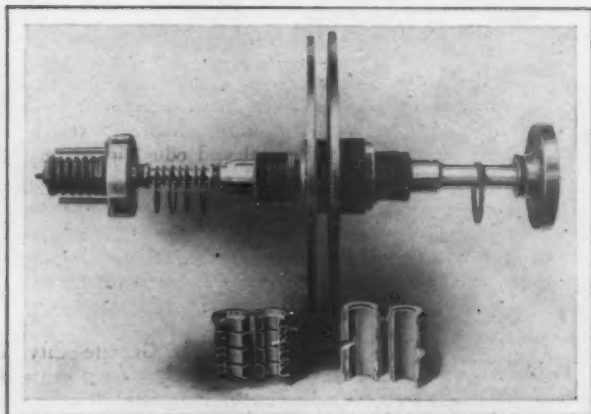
The Shaft with the Wheels, Governor, Packings and Couplings Assembled Thereon
